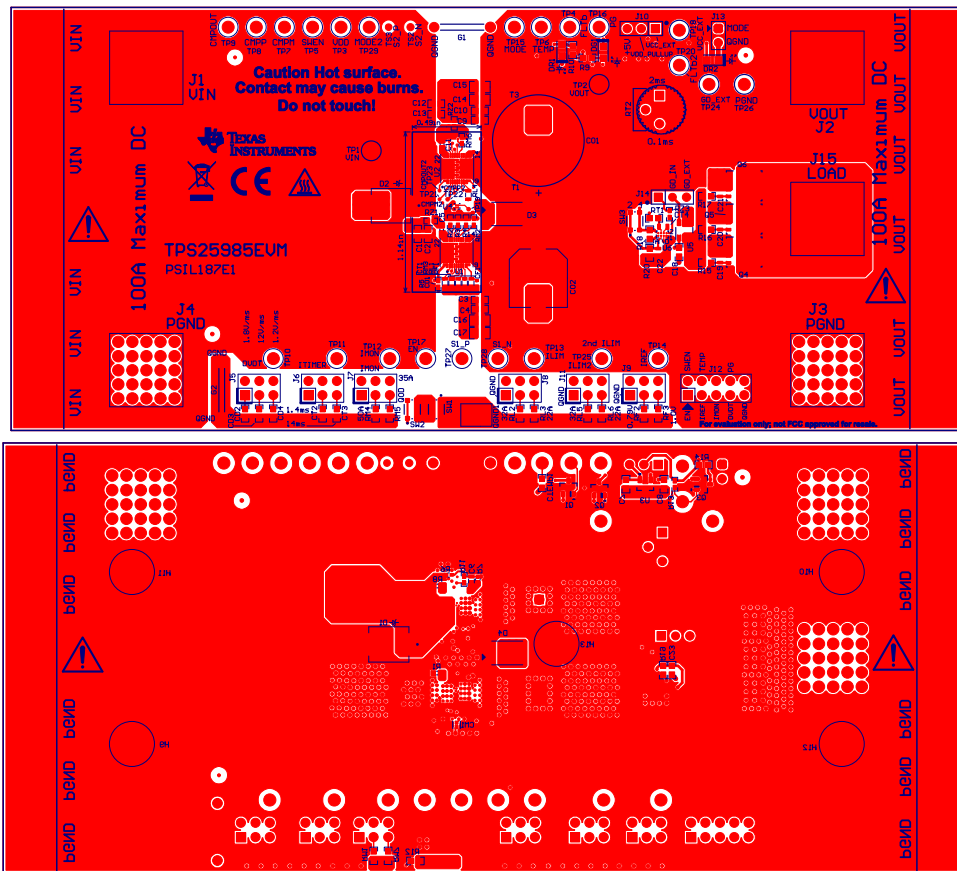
TPS25985EVM Board (a) Top Layer (b) Bottom Layer
